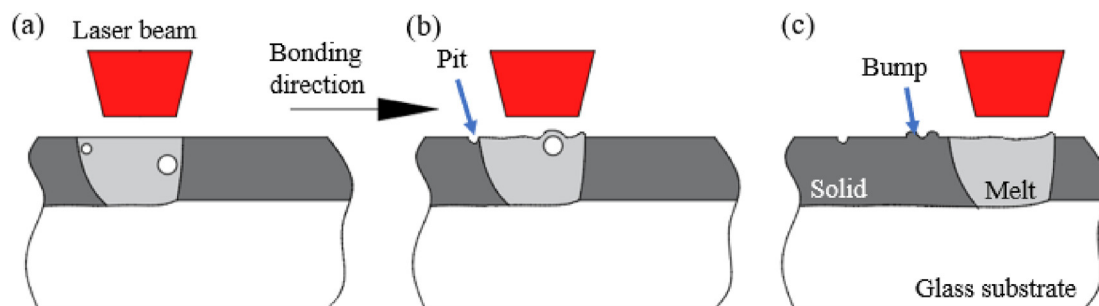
Schematic diagram of laser re-sintering process (cross-section): (a) Forming bubbles; (b) Forming pit; (c) Forming bump.
